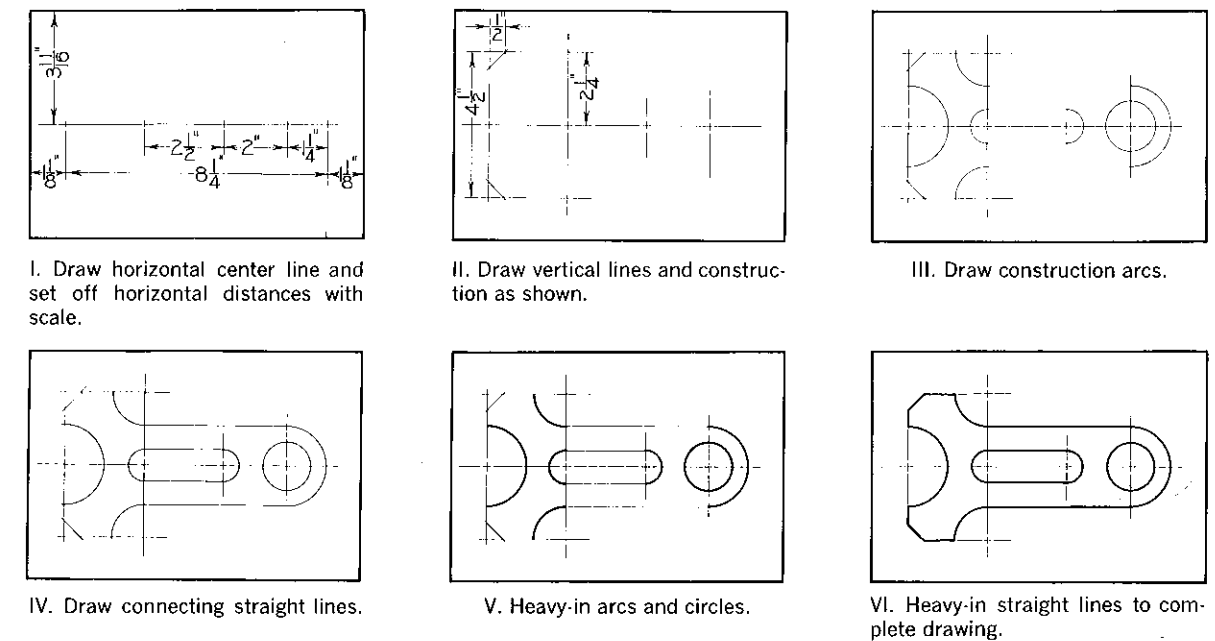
Steps in drawing adjusting arm. Use Layout A in Appendix.
